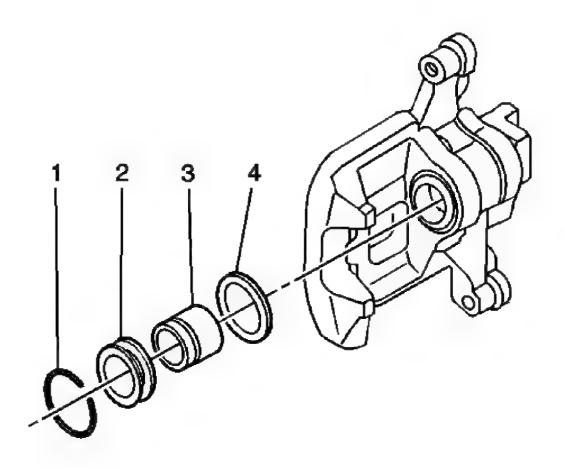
Exploded View Of Brake Caliper Courtesy of GENERAL MOTORS CORP.
